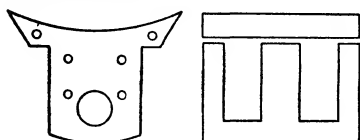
Two types of lamination used in electrical work, showing part of a stator core (a) and rotor stamping suitable for a small machine (b).
